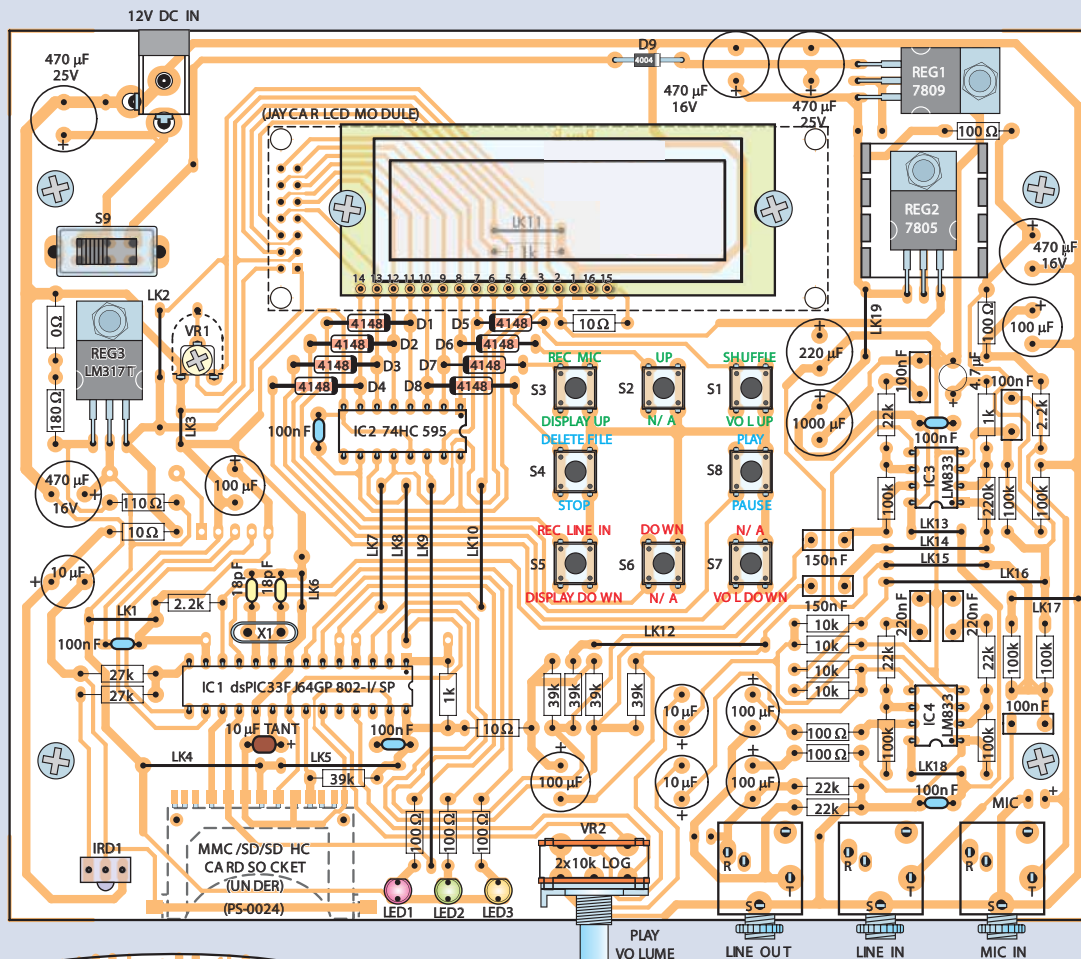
(above): install the parts on the PC board as shown on this component layout diagram. Take care to ensure that all polarised parts are correctly oriented and leave the ICs and the LCD module off the board until after the initial power supply checks have been completed.
